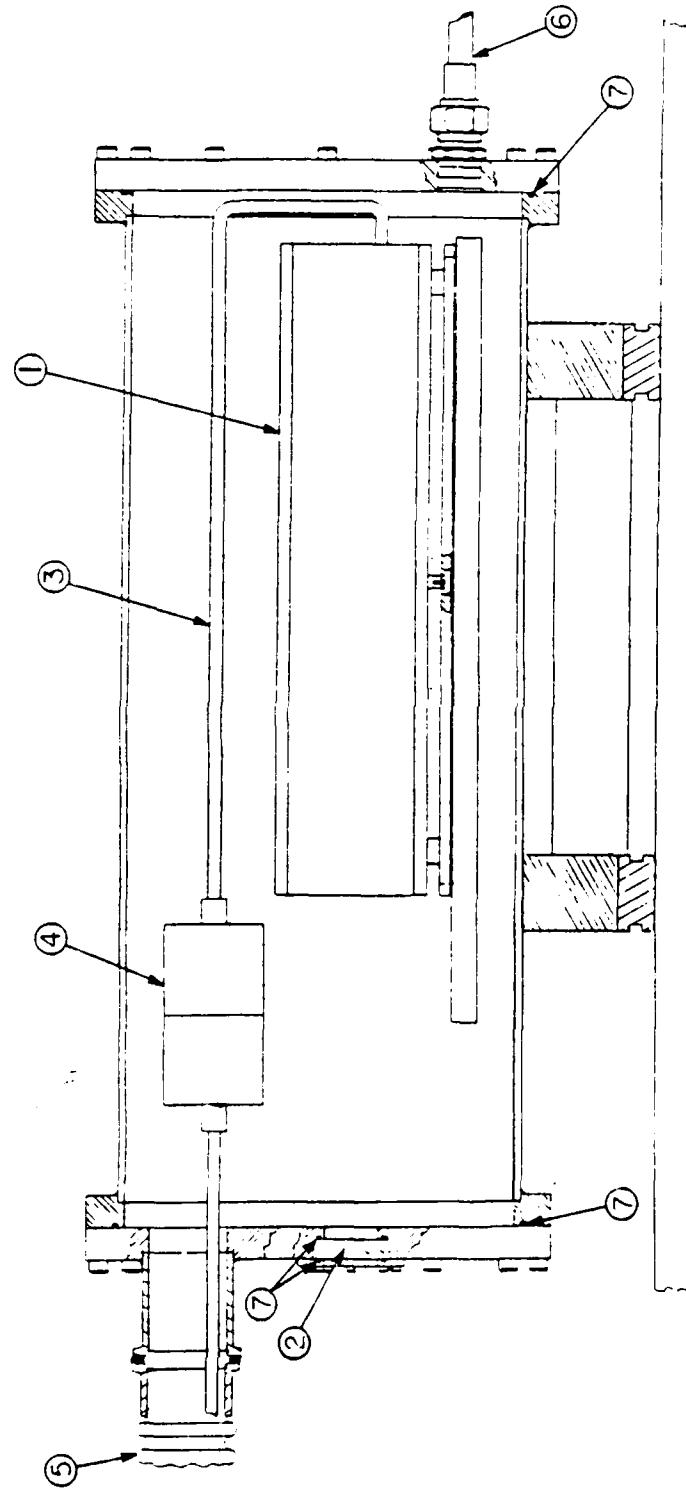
Reference Laser Pressure Enclosure. (1) Reference laser, (2) output window, (3) electrical cables, (4) cable connector, (5) flexible coupling to outside of vacuum chamber, (6) cooling line, and (7) O-ring seals
